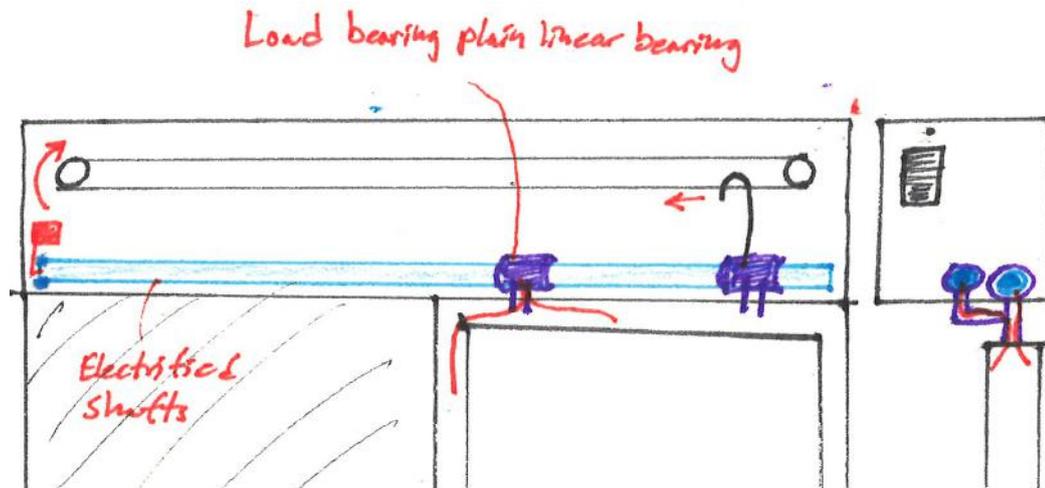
Concept 23 - Load bearing capacitive plain bearing. A concept that eliminates the conventional door carriages, wheels and tracks from the sliding doors. These are replaced with two electrified shafts in the header profile and two load bearing plain linear bearings for each door that can both hold the door in place as well as supply the door with power through capacitive power transfer.
